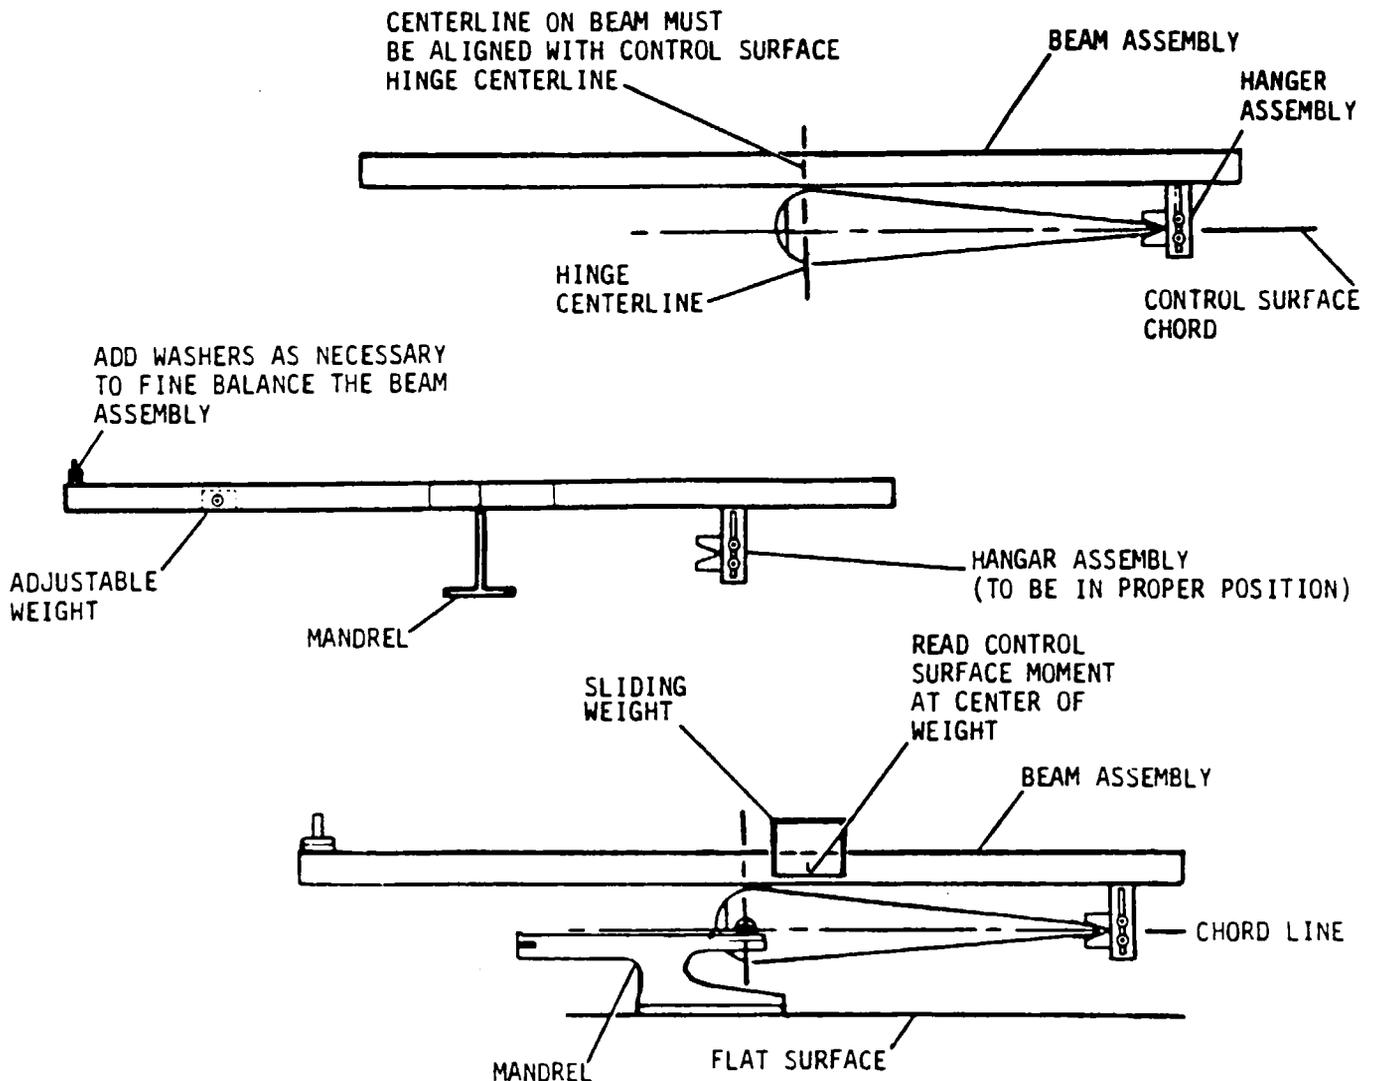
Control Surface Balancing (Sheet 2 of 5)
